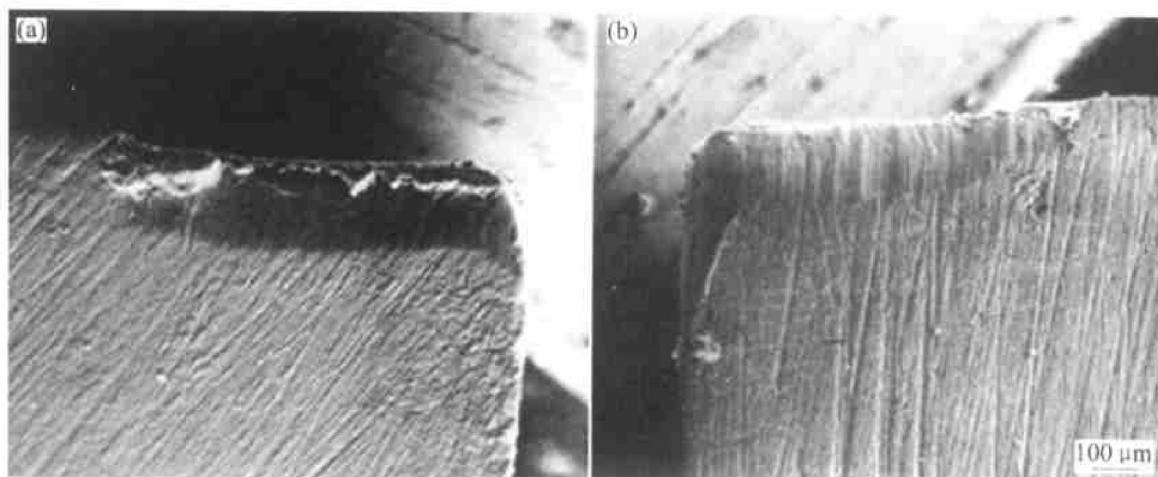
Rake (a) and flank (b) surface morphologies of HSS tool after turning at a speed of 17.27 m/min for 55 min
